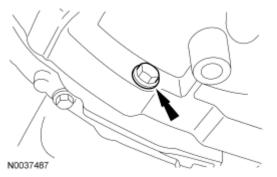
Locating Bellhousing-To-Oil Pan Bolt Courtesy of FORD MOTOR CO.
